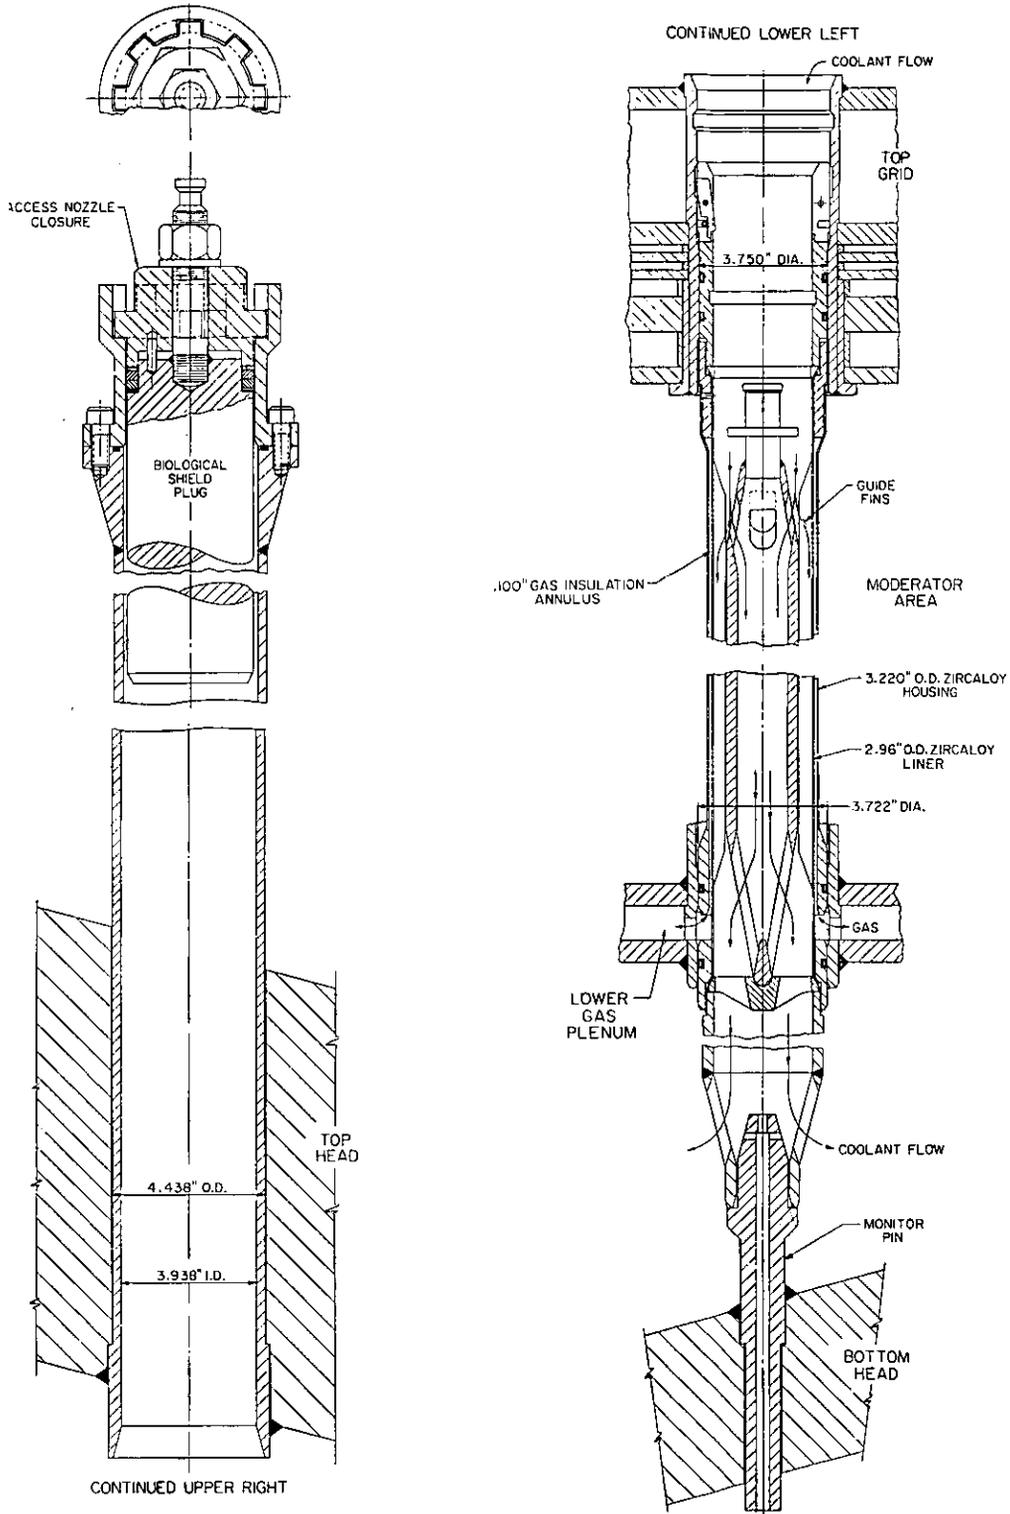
FUEL ELEMENT AND HOUSING TUBE ASSEMBLY FOR TYPE SB-4 REACTOR
